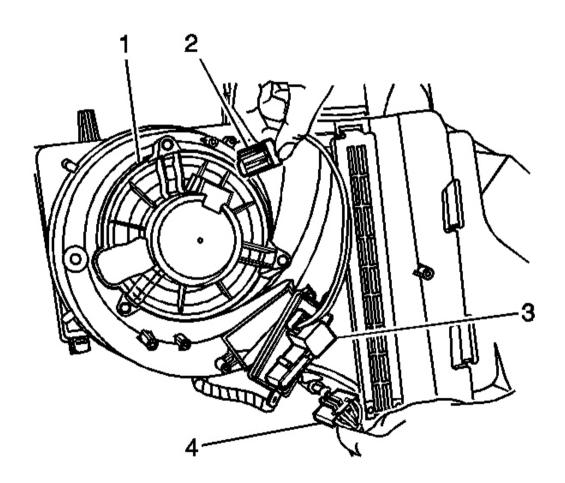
Blower Motor Control Processor & HVAC Module Assembly Courtesy of GENERAL MOTORS CORP.
